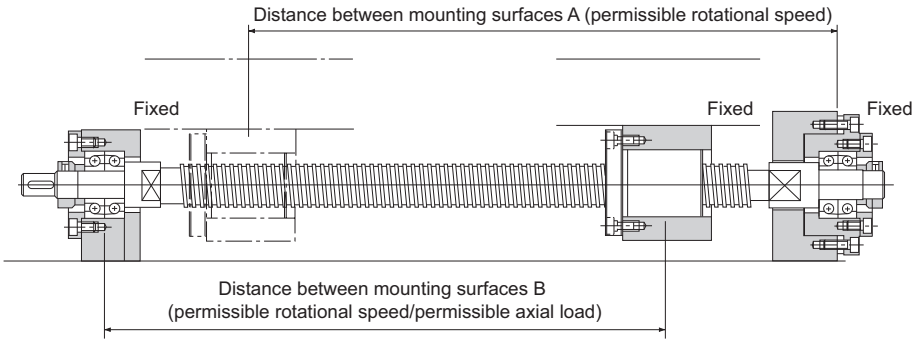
Screw Shaft Mounting Method: Fixed - Fixed
